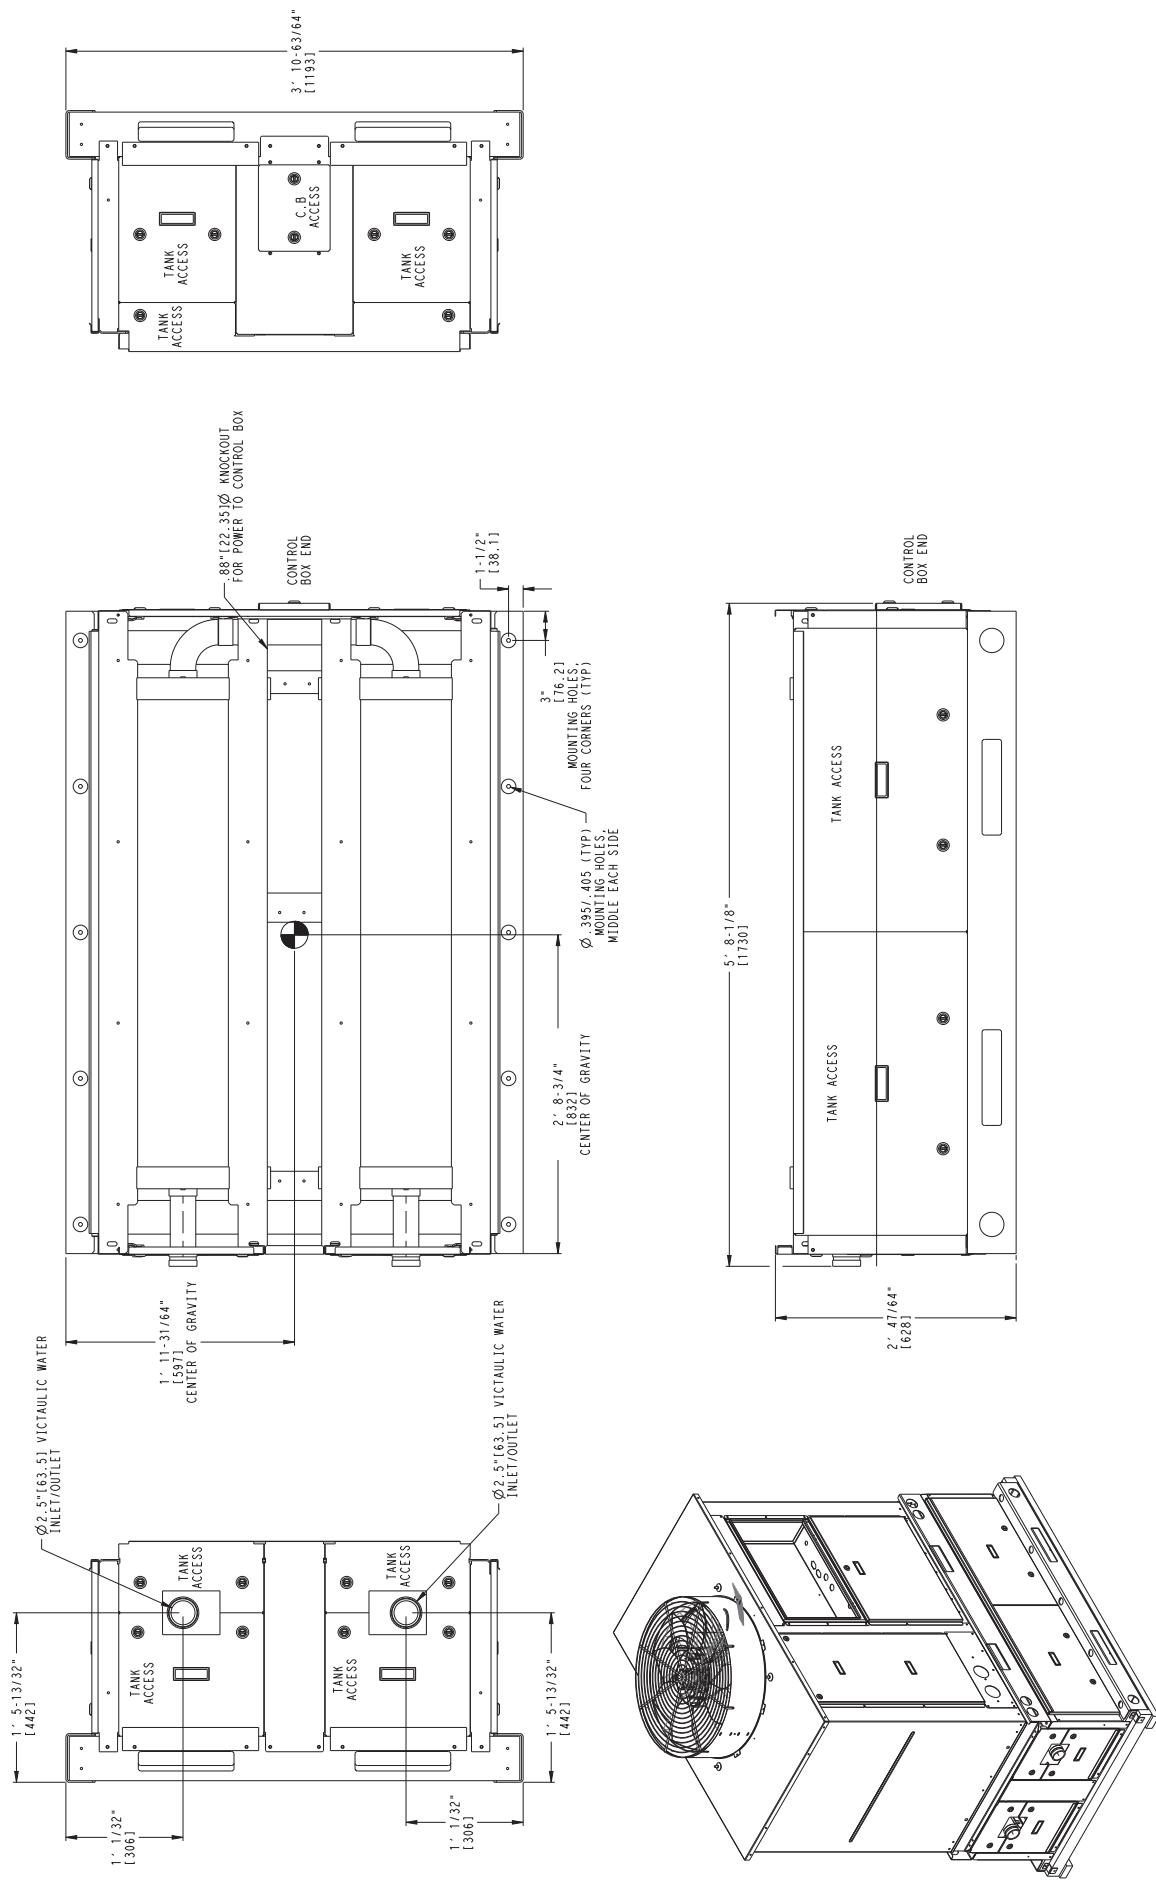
Accessory Storage Tank Dimensions — 30RAP010,015 Units
